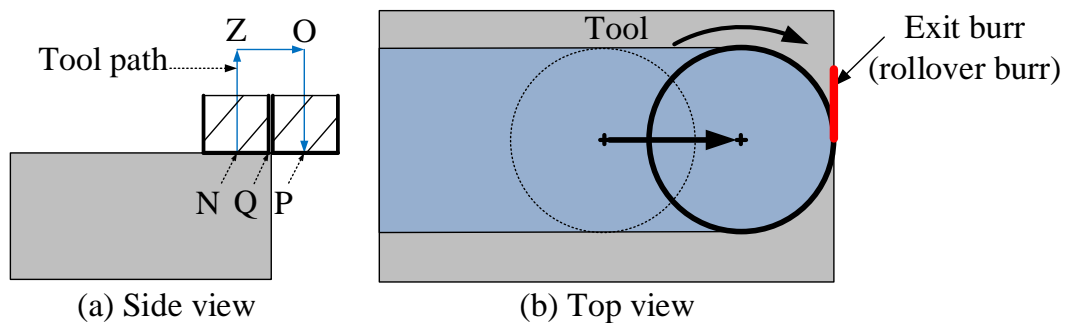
Exit burr formed in case of cutting tool engaged from inside.
